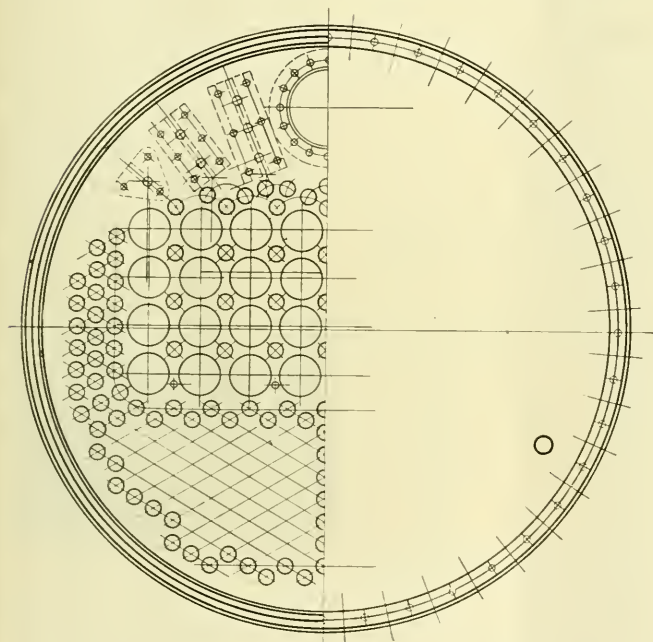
LOCOMOTIVE BOILER FRONT SHOWING NUMBER AND LOCATION OF SUPERHEATER FLUES.
